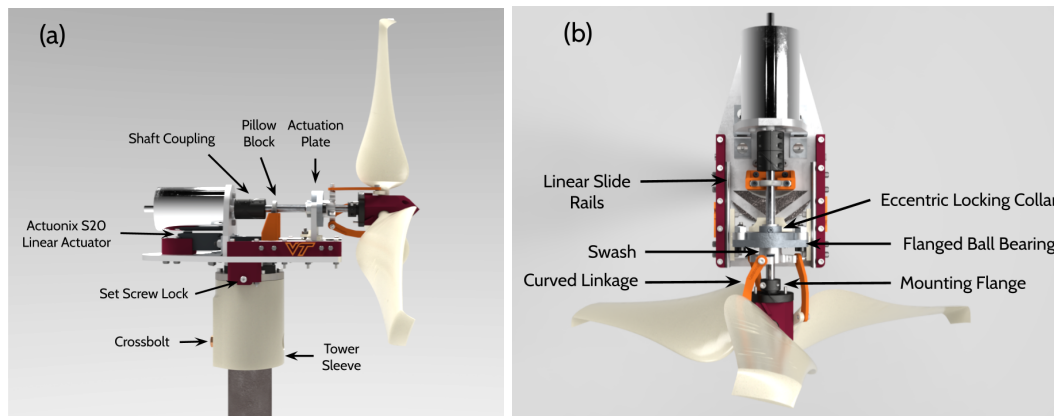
(a) Side View of Nacelle Assembly, (b) Top View of Nacelle Assembly
